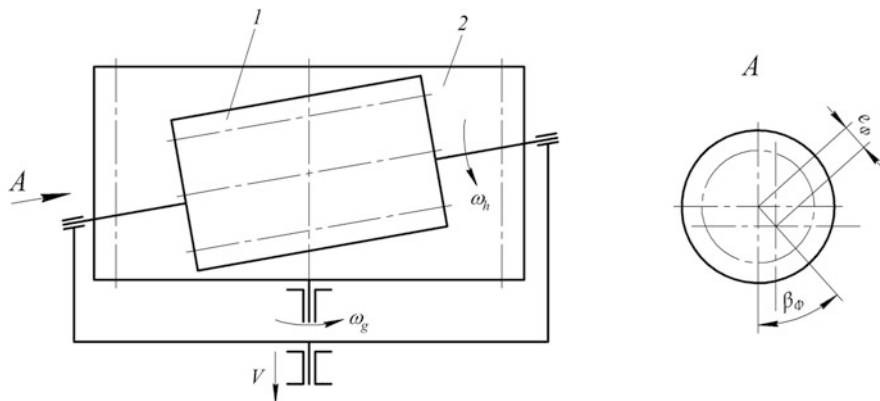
The scheme of a milling gear's eccentrically installed hob
